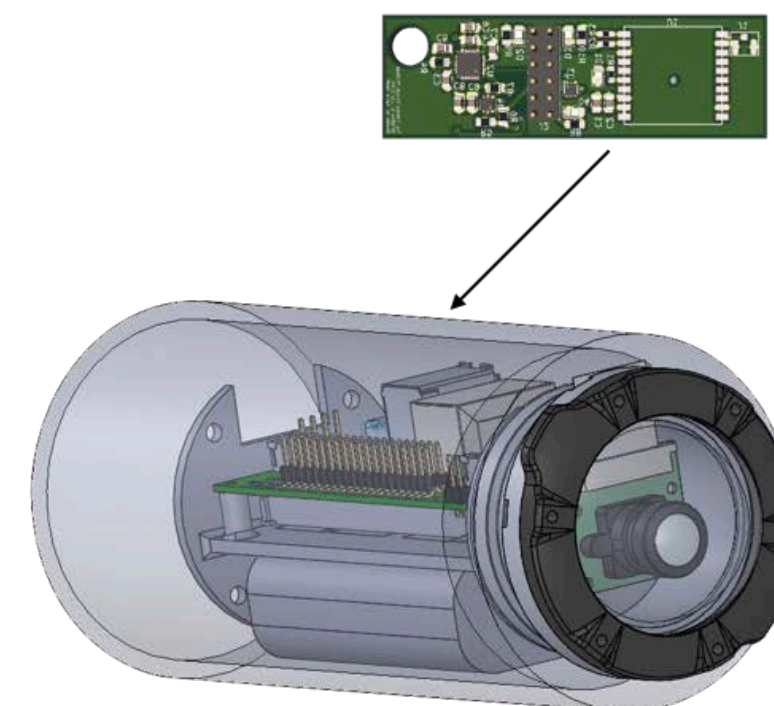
Rough concept of placement of hardware in housing. The housing won't simply be cylindrical since the lights and the board need to be properly waterproofed. Sensor PCB is also shown in the image.
